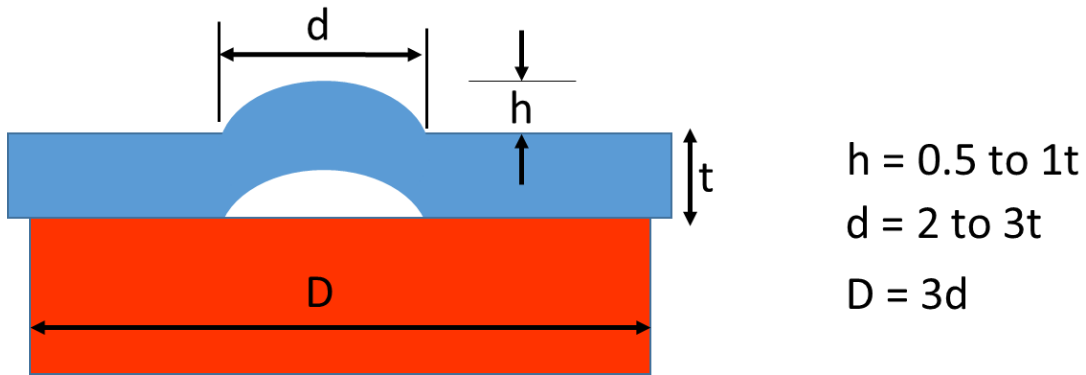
Schematic shows guidelines for ratios and dimensions of a dimple projection with reference to the sheet thickness (t). Also shown is the welding electrode with diameter D.
